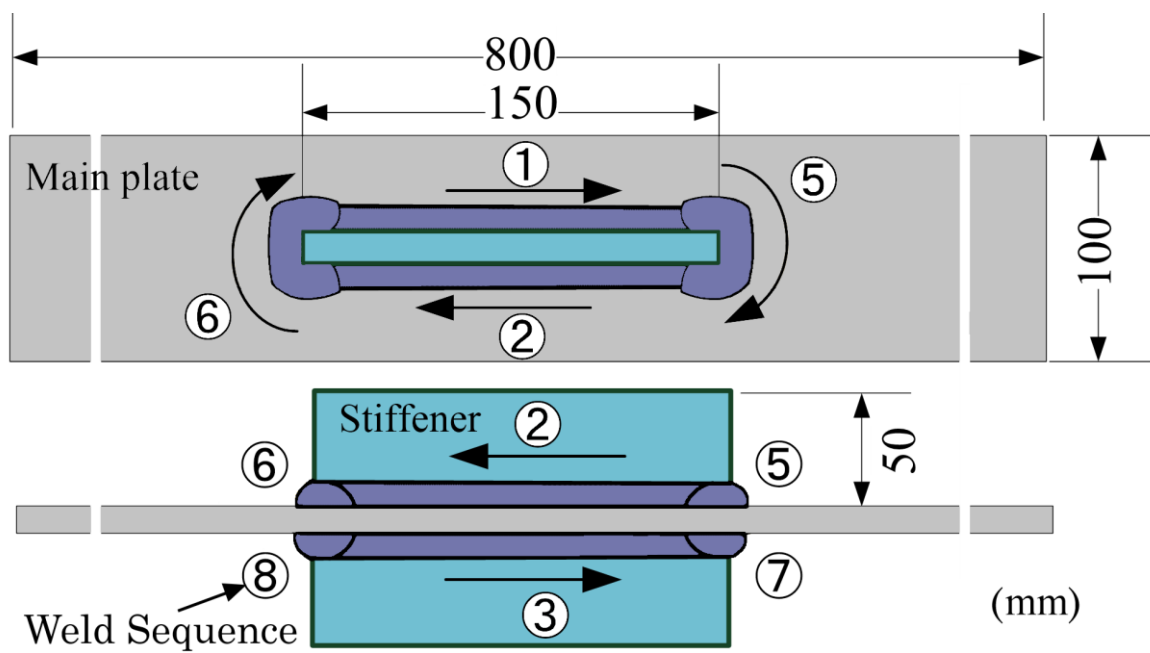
Shape and size of boxing fillet welded joint specimen
